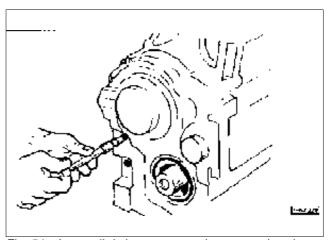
Insert all timing case securing screws but do not tighten fully;
